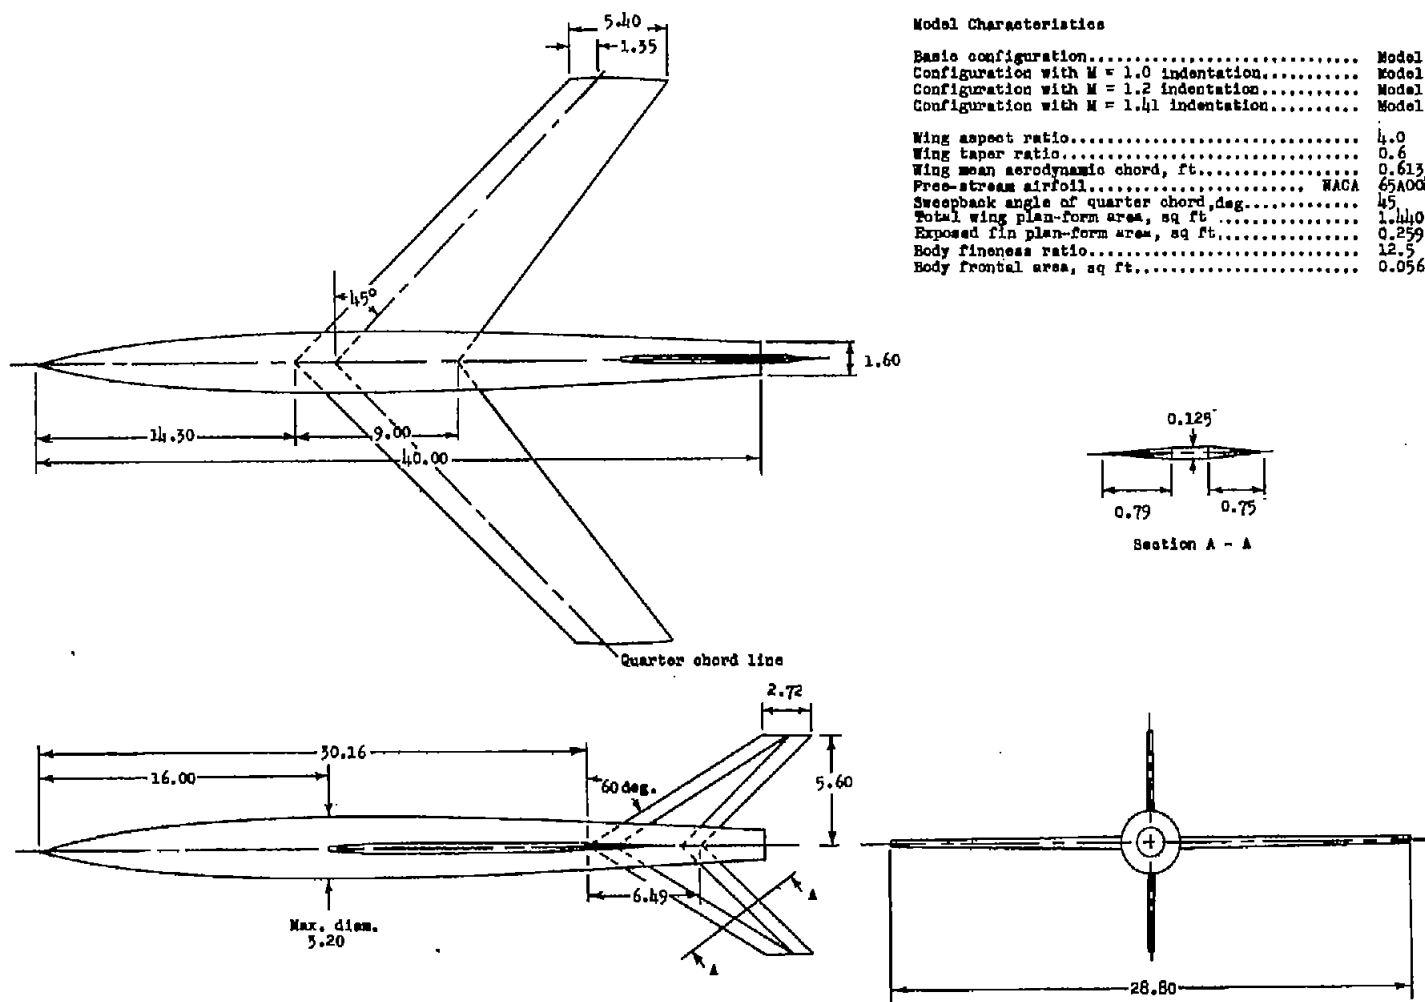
Details and dimensions of basic configuration. All dimensions are in inches.
